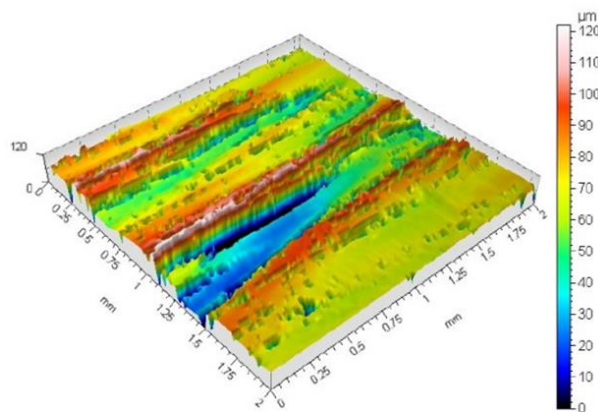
39 3D surface morphology after laser machining of low carbon steel (Miraoui, et al., 2014)
